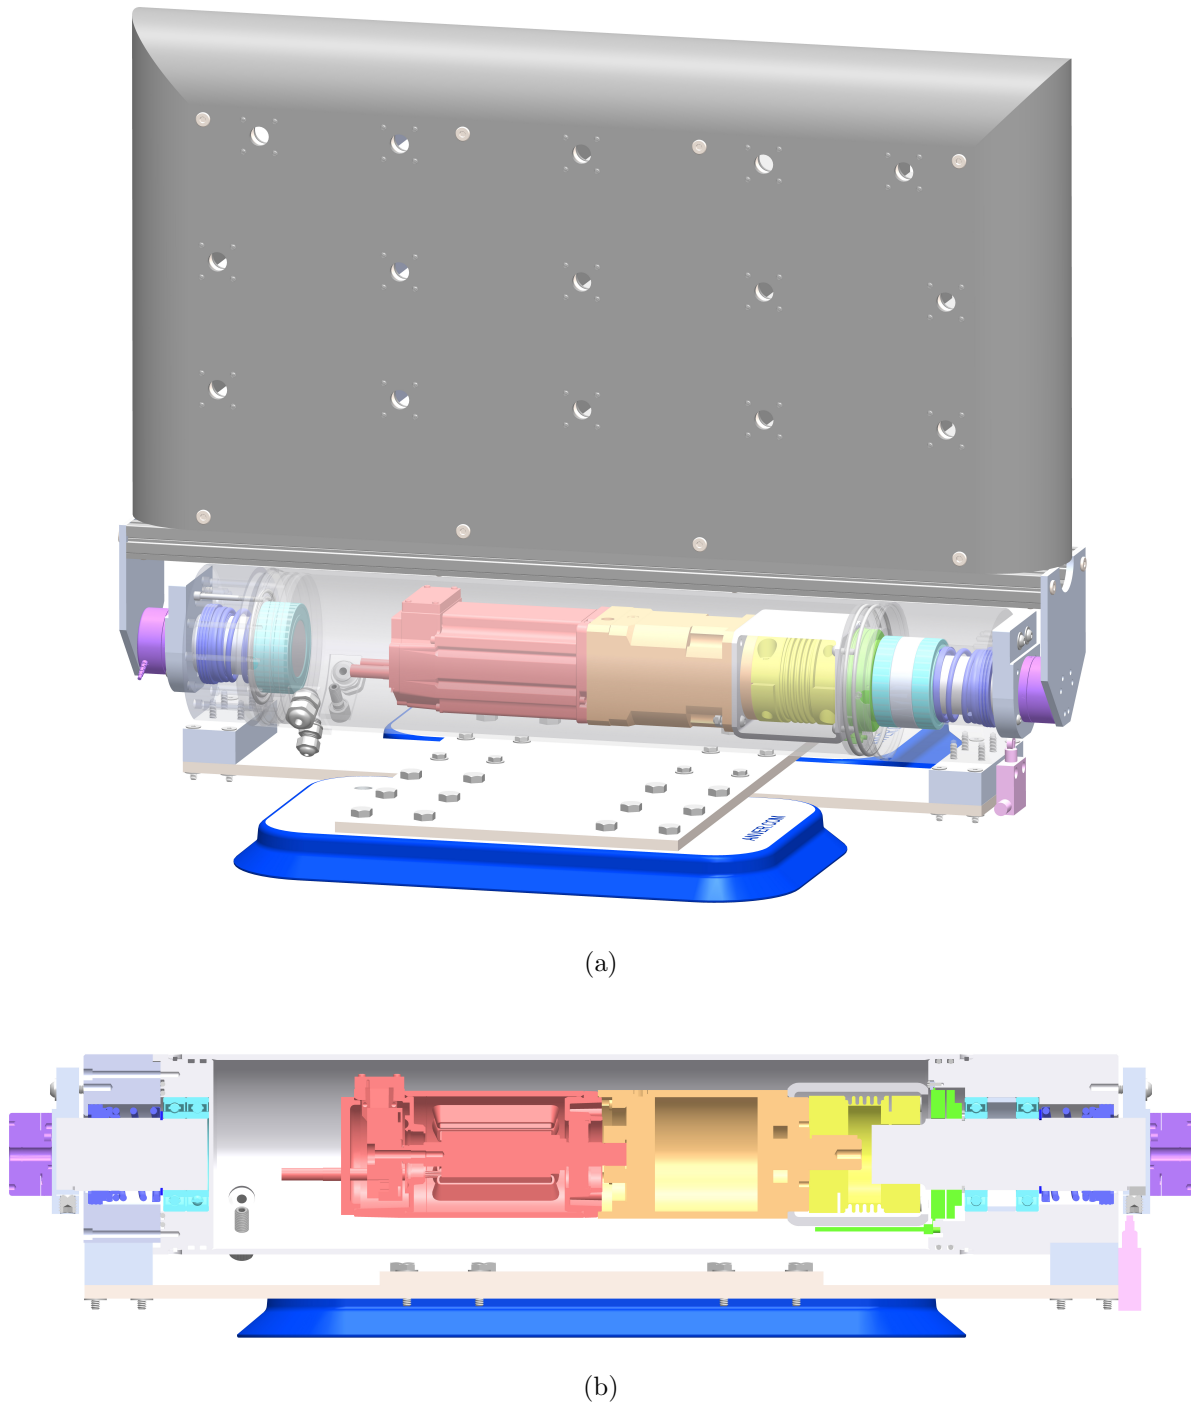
OSWEC design shown as a (a) full assembly and (b) section view of the driveline with the motor (red), gearbox (orange), coupling (yellow), encoder (green), bearings (light blue), seals (dark blue), limit switch (pink), and load cells (purple) highlighted.
